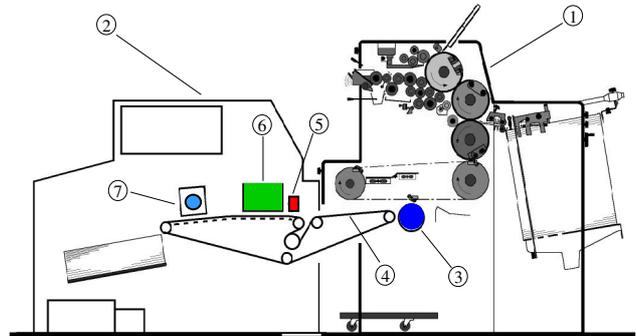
Combination of offset press and inkjet imprinting unit. 1: Quickmaster 46-1 offset press, 2: inkjet imprinting unit, 3: vacuum cylinder, 4: vacuum belt, 5: paper edge sensor, 6: inkjet heads, 7: UV dryer
